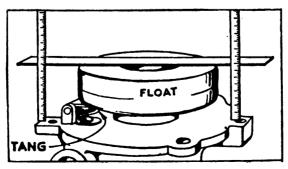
CARBURETOR FLOAT ADJUSTMENT
